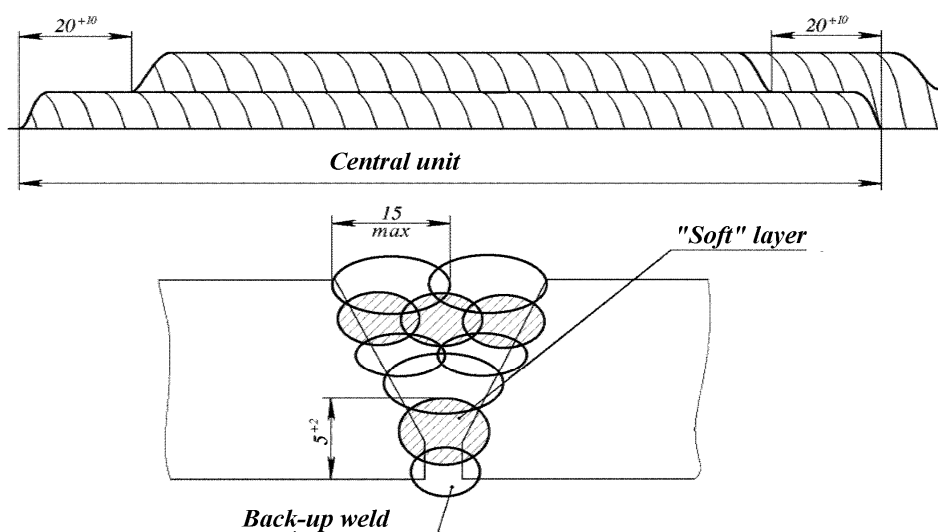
Diagram of arrangement of the welding layers in the block and scheme of performing the multilayer welds
